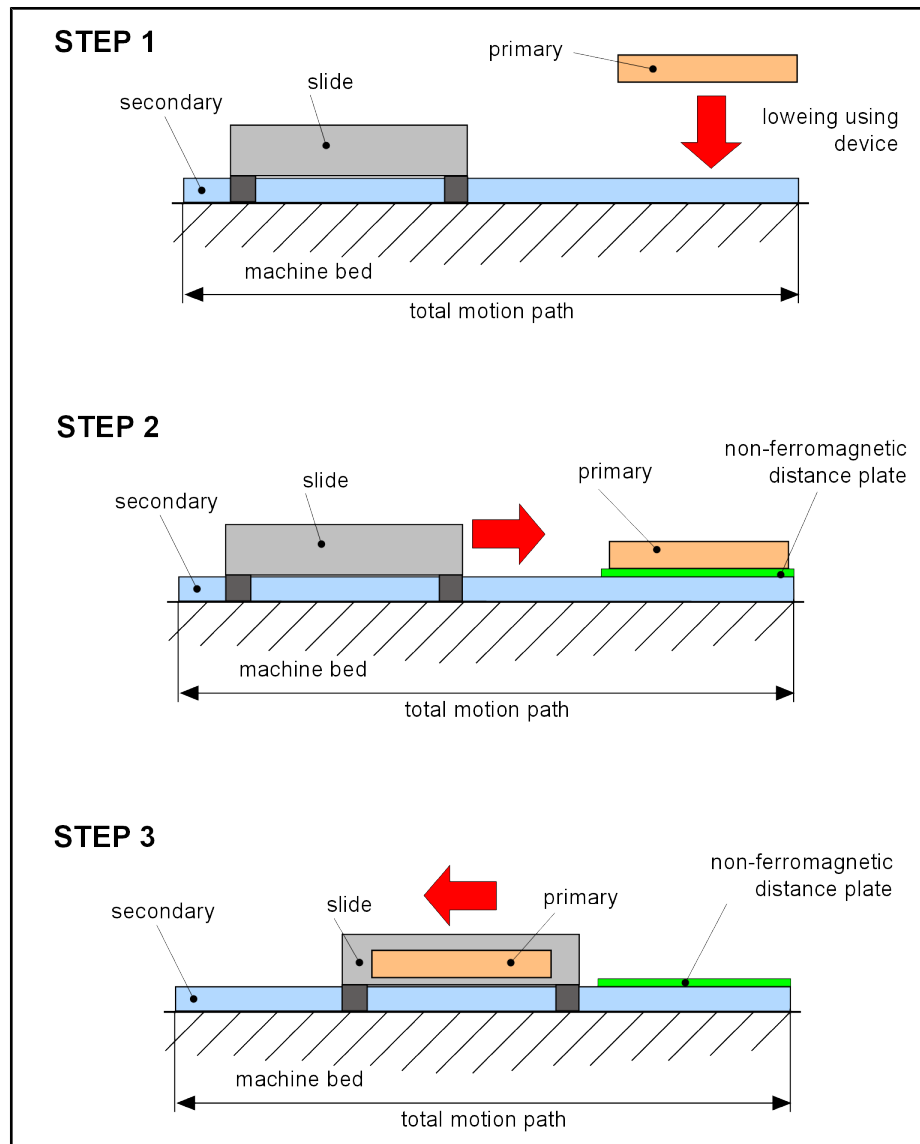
Installation of the linear motor components at whole secondary part over the entire traverse path
